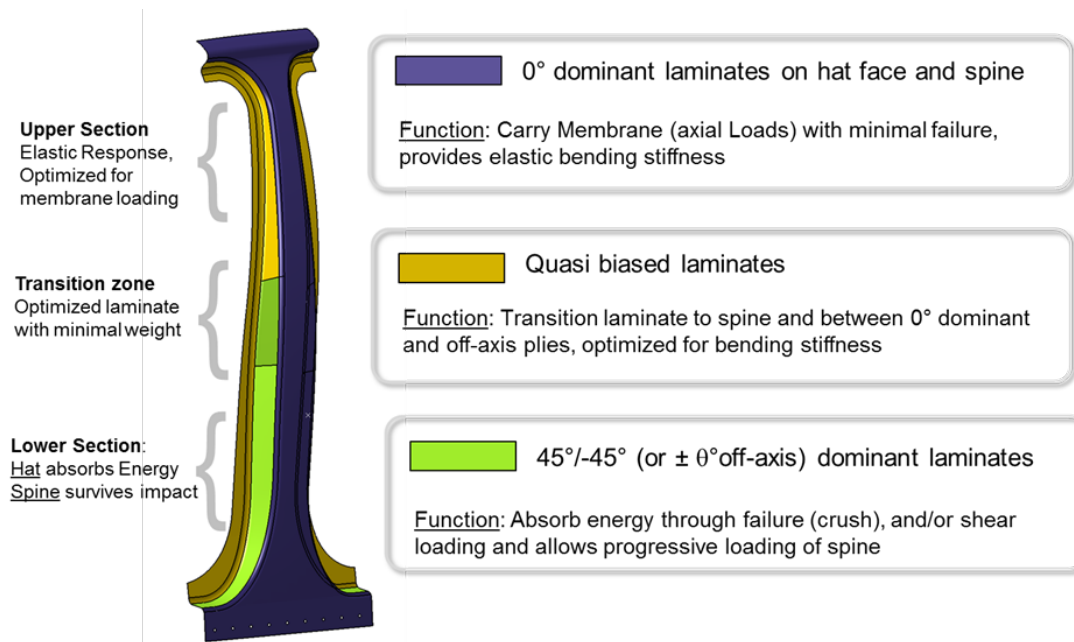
Pillar Design Zones and Typical Cross Sections
